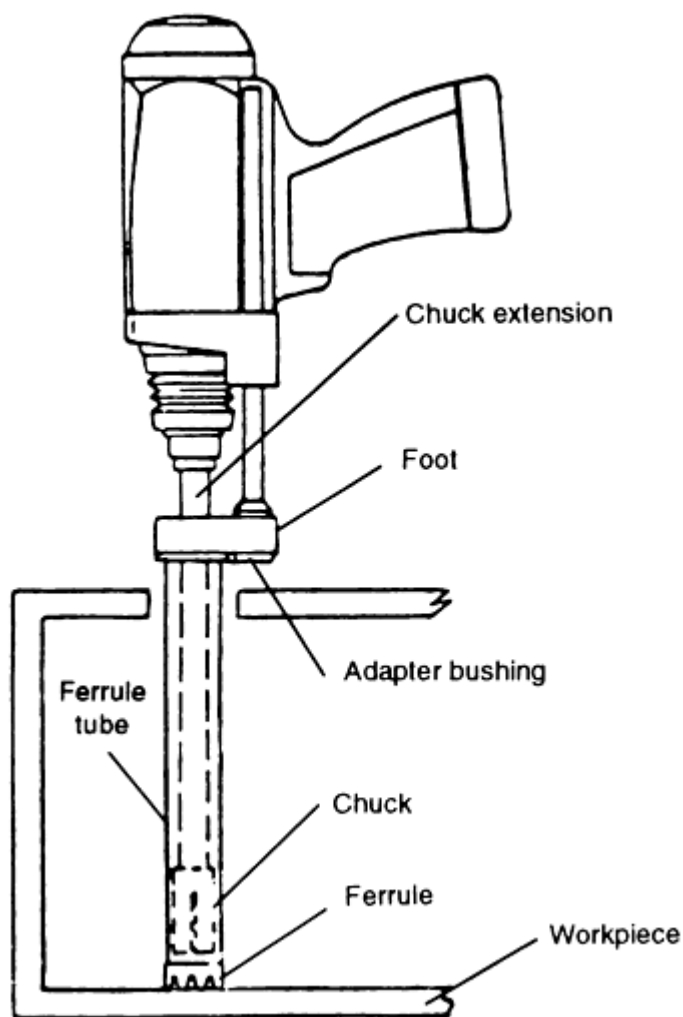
PORTABLE STUD ARC WELDING GUN EQUIPPED WITH ACCESSORIES FOR WELDING STUDS THROUGH
